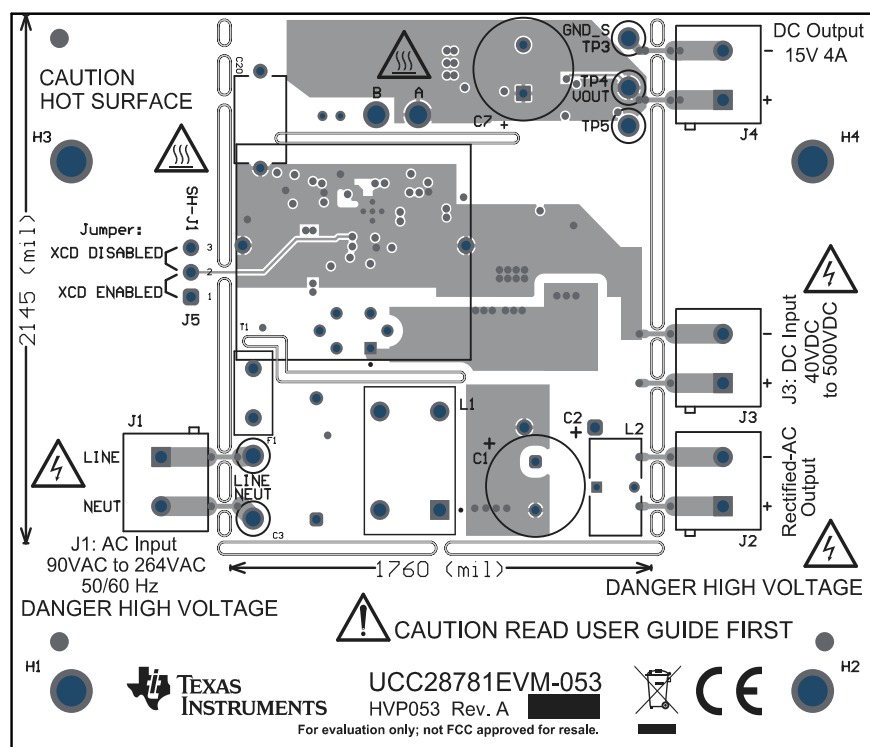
Top-Side Assembly and Top Layer of PCB
